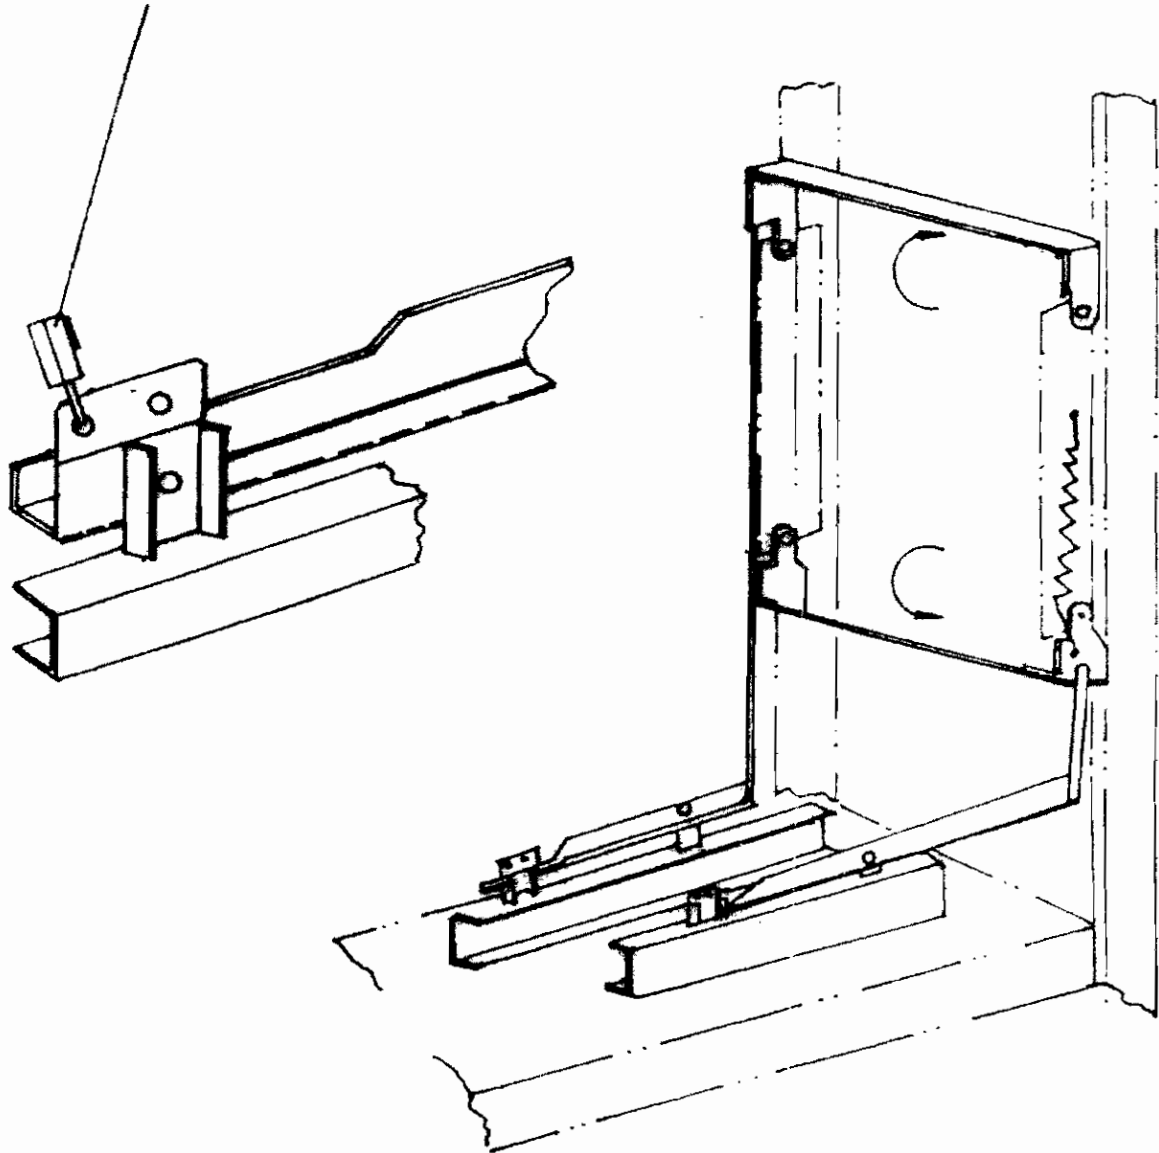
C SHUTTER ASSEMBLY WITH PADLOCKING ARRANGEMENT IN CLOSED CONDITION
